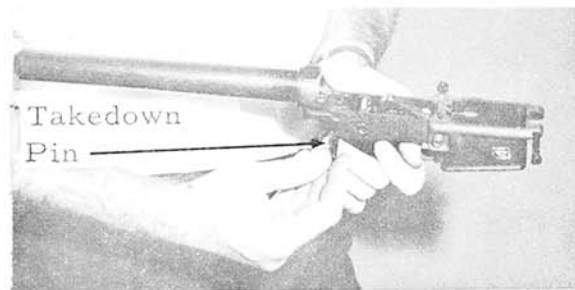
TAKEDOWN PIN DISASSEMBLY.
